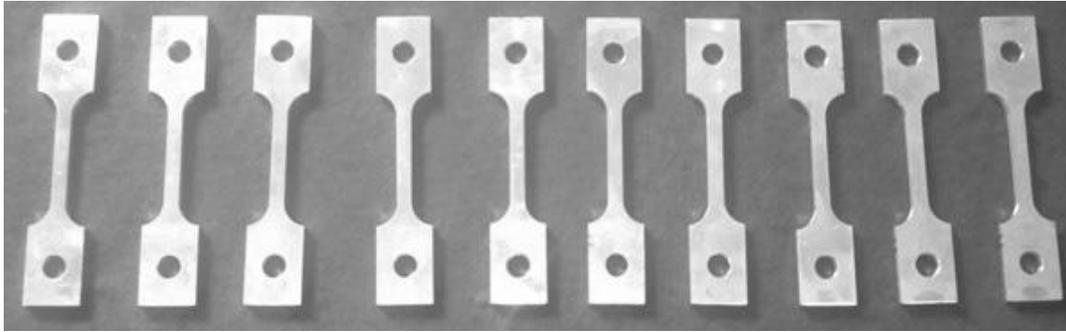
b) SCC Samples Prepared from Friction Stir Welded AA7075 Plates
